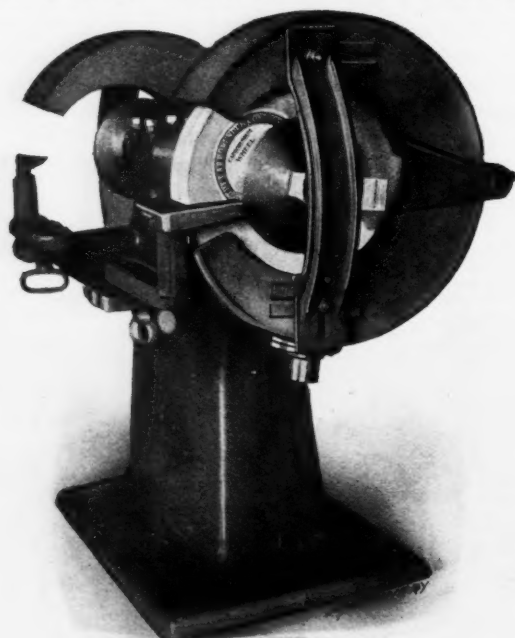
Grinding Machine equipped with Valley City Wheel Guards
